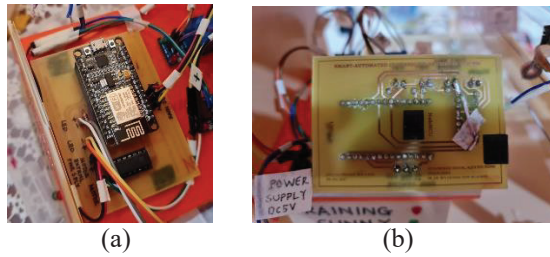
Results of the PCB Design: (a) Top View, and (b) Bottom View
